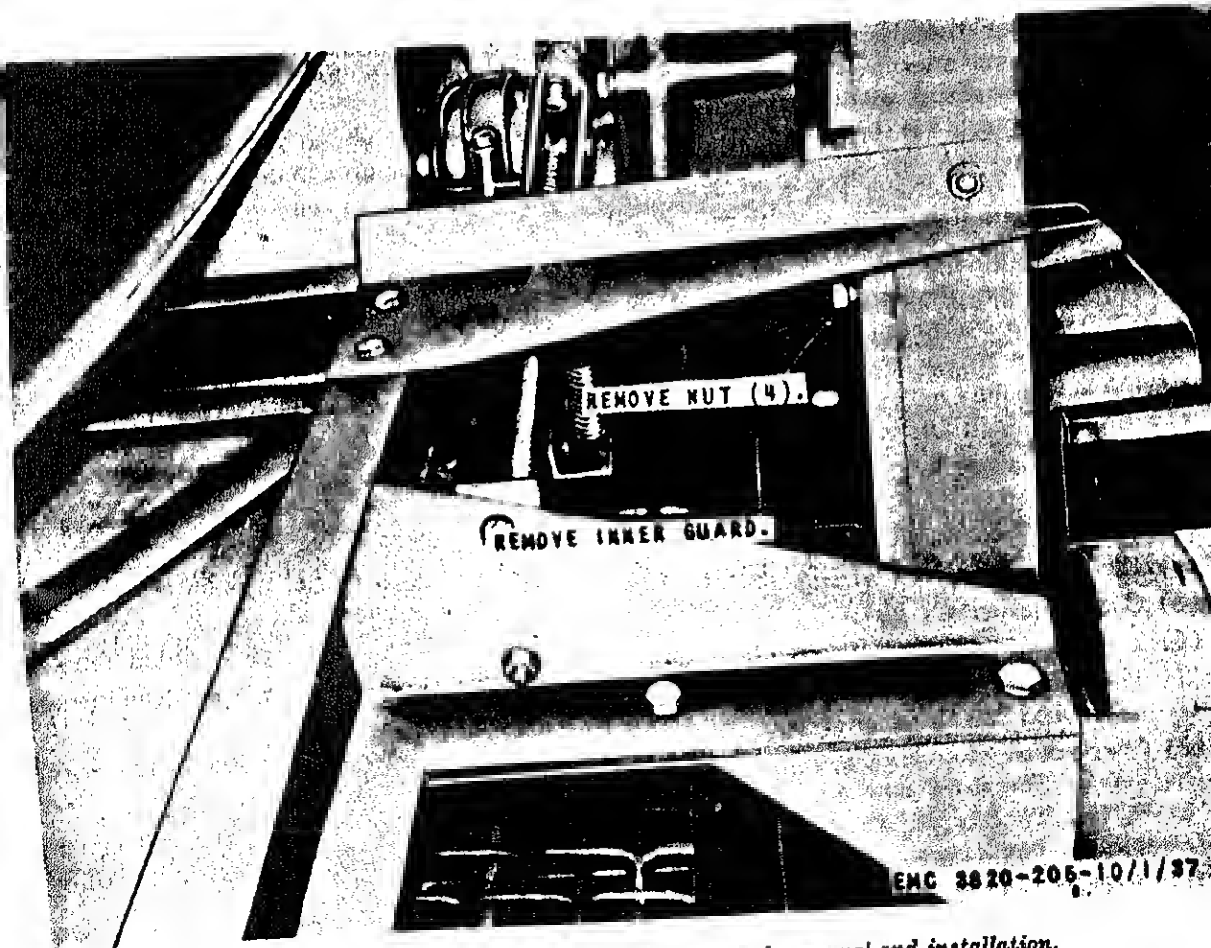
Main (feed) conveyor drive belt guard, removal and installation.
